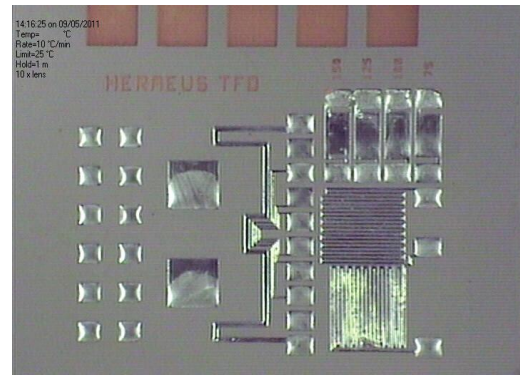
Solder acceptance of CL81-10347 with SAC 305 solder.
